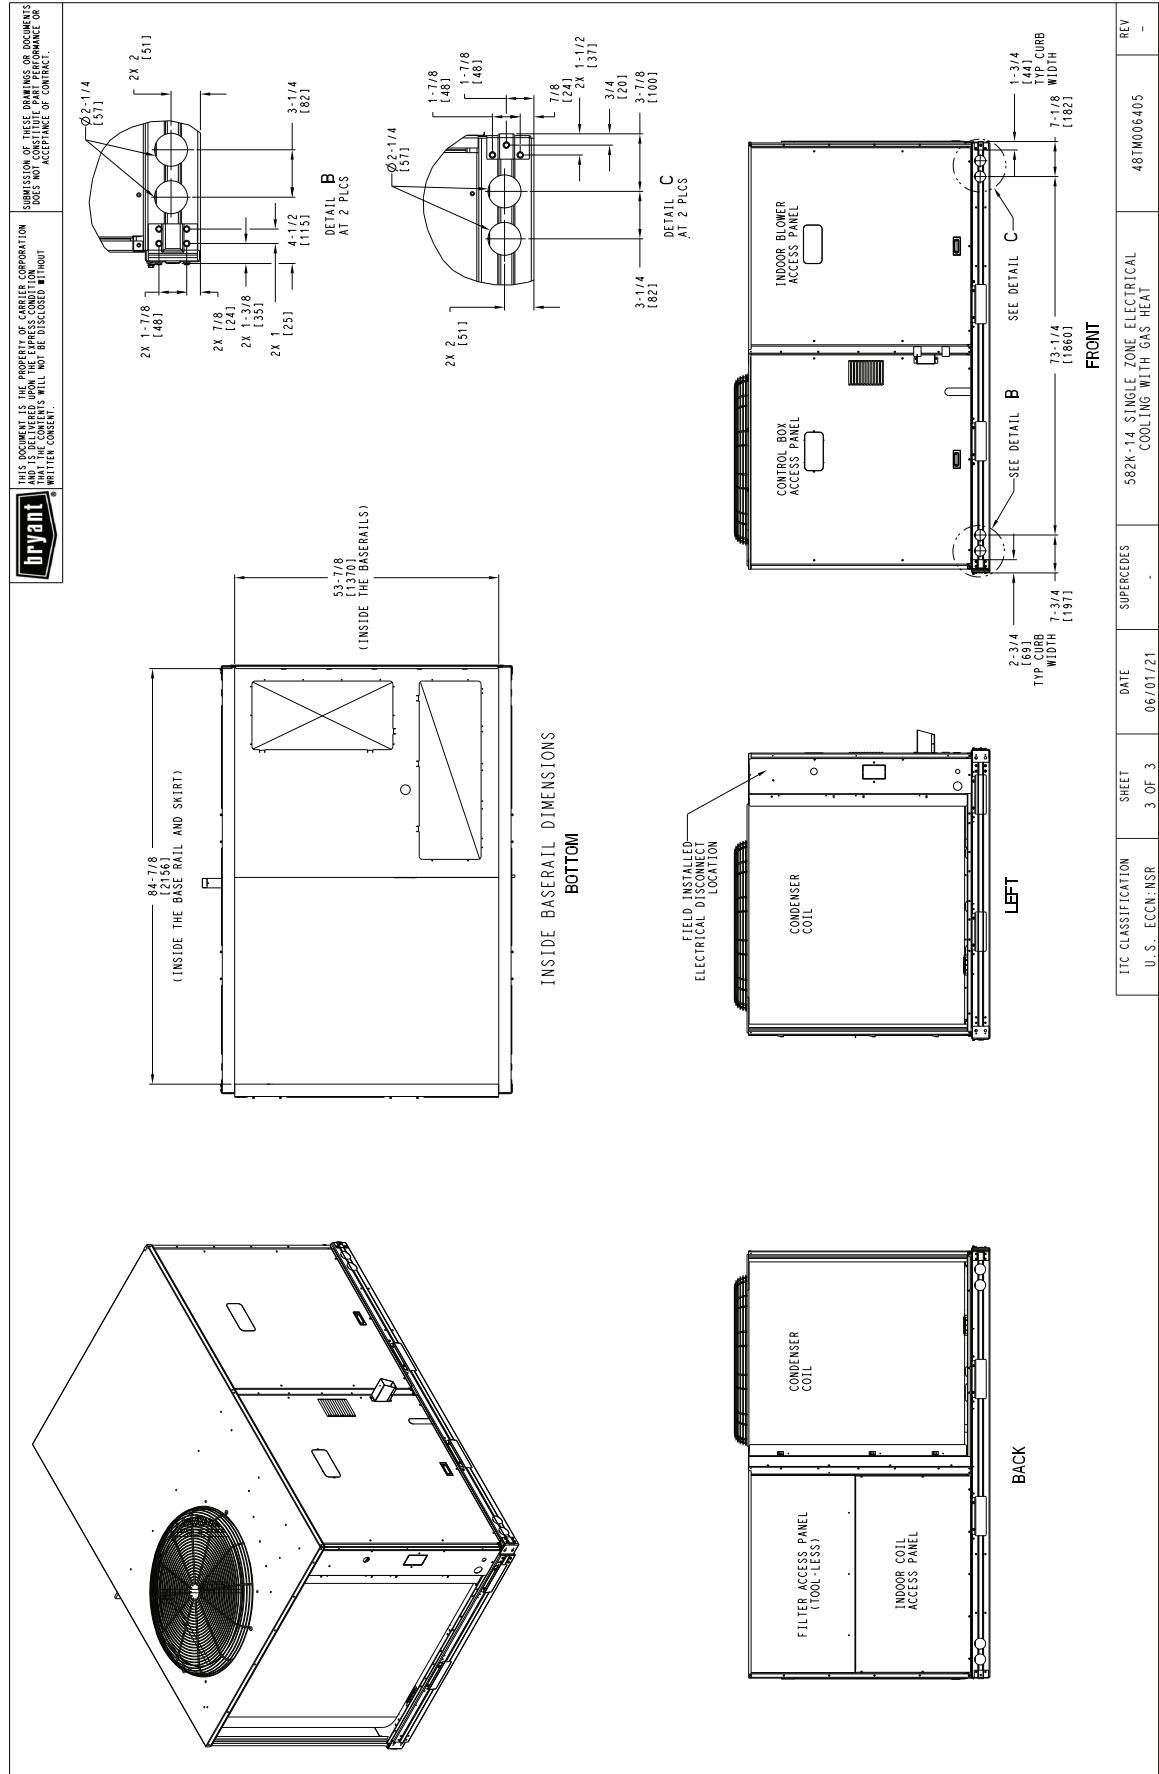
582K\*\* 14 Unit Dimensional Drawing (cont)
